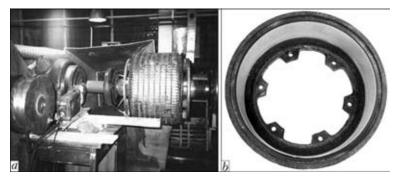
Reconditioning of the shaft of electric motor rotor (a) and lorry brake drum (b)
